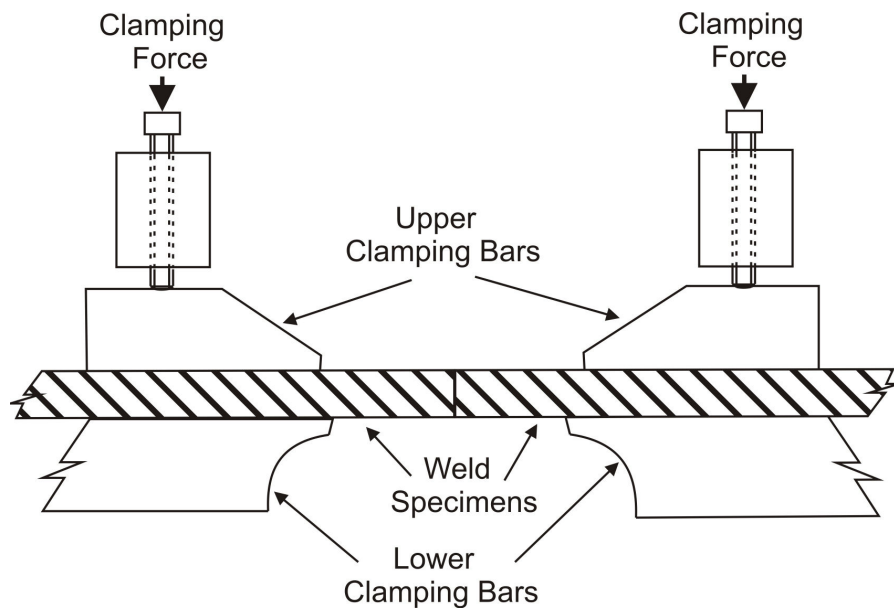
Schematic of the weld specimen clamping system (taken from Kwon [29]).
